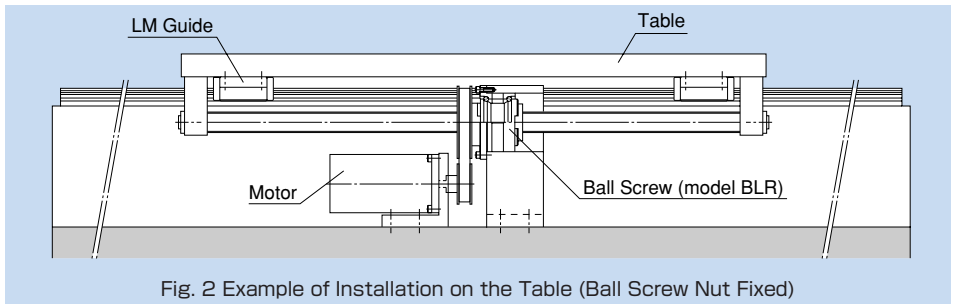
Example of Installation on the Table (Ball Screw Nut Fixed)
